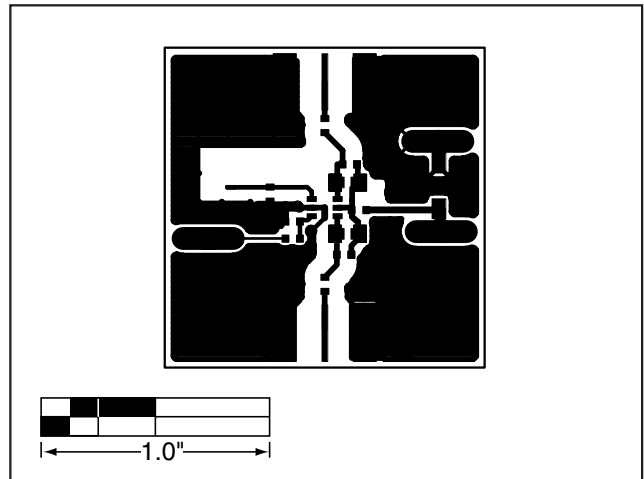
MAX2608/MAX2609 EV Kits PC Board Layout—Component Side
